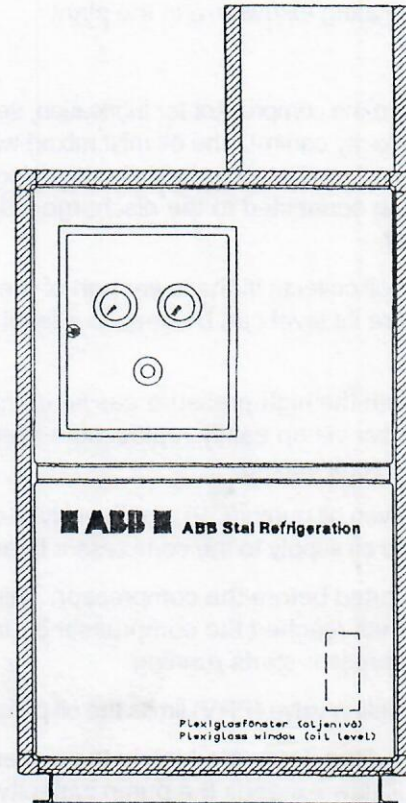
Stal-Mini screw compressor unit, series SV10 with sound damping enclosure
